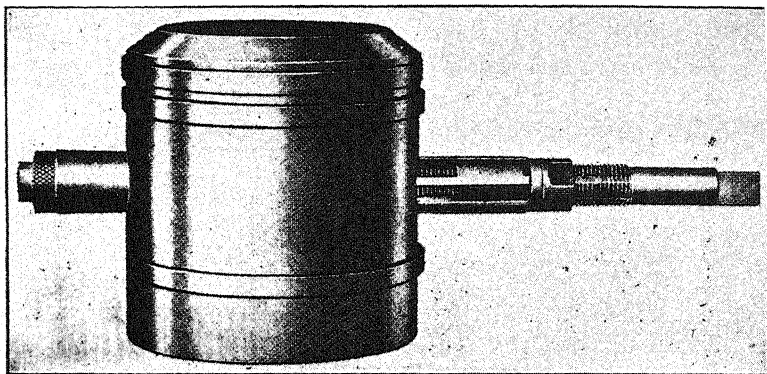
Adjustable reamer (with pilot) used for enlarging new bushings (Fig. 363) or holes in piston (Fig. 262) so that new wrist pin will enter.
